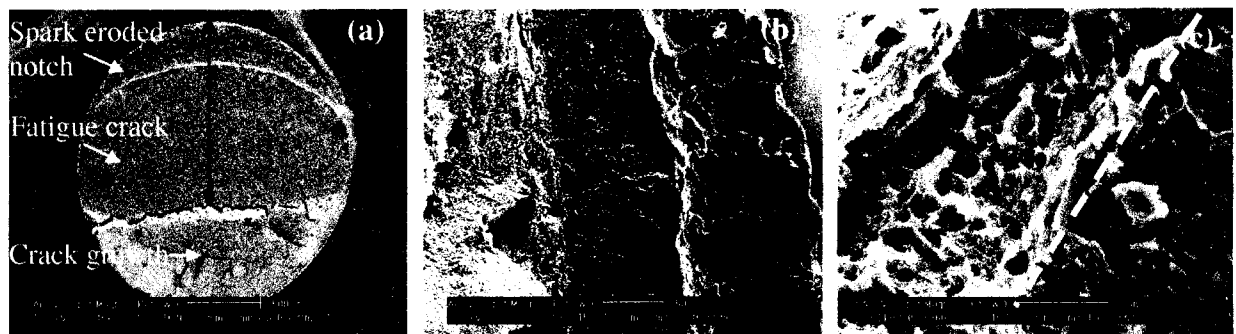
(a) Measurement of crack length, (b) Appearance of (right to left) spark eroded notch, fatigue crack and crack growth. (c) Close-up of fatigue/ductile failure interface.
